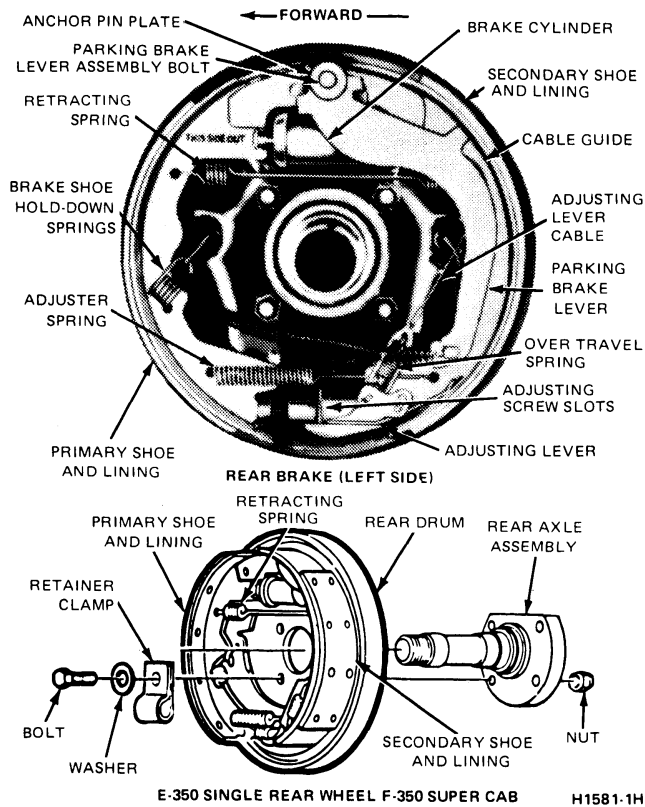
Self Adjusting Brake Assemblies—Heavy Duty—E-250—E-350, F-250—F-350
